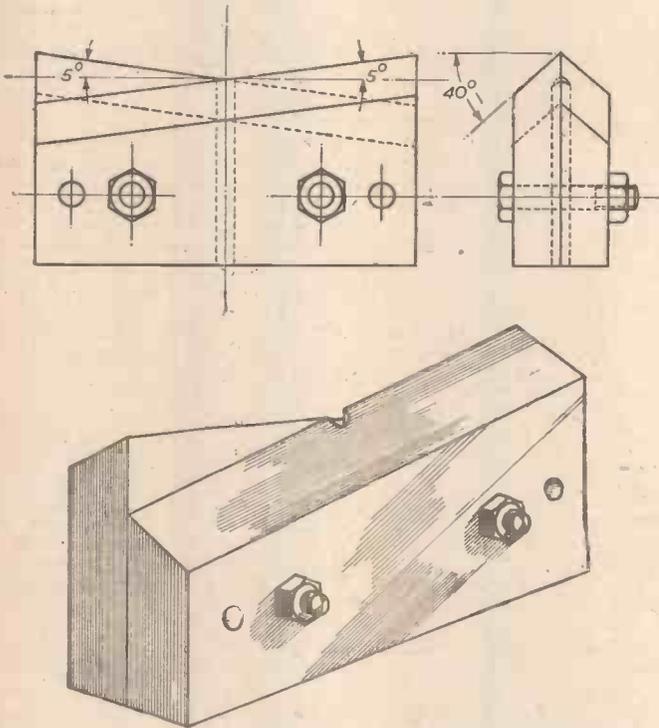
Simple two-piece clamp for holding twist drills for sharpening.
